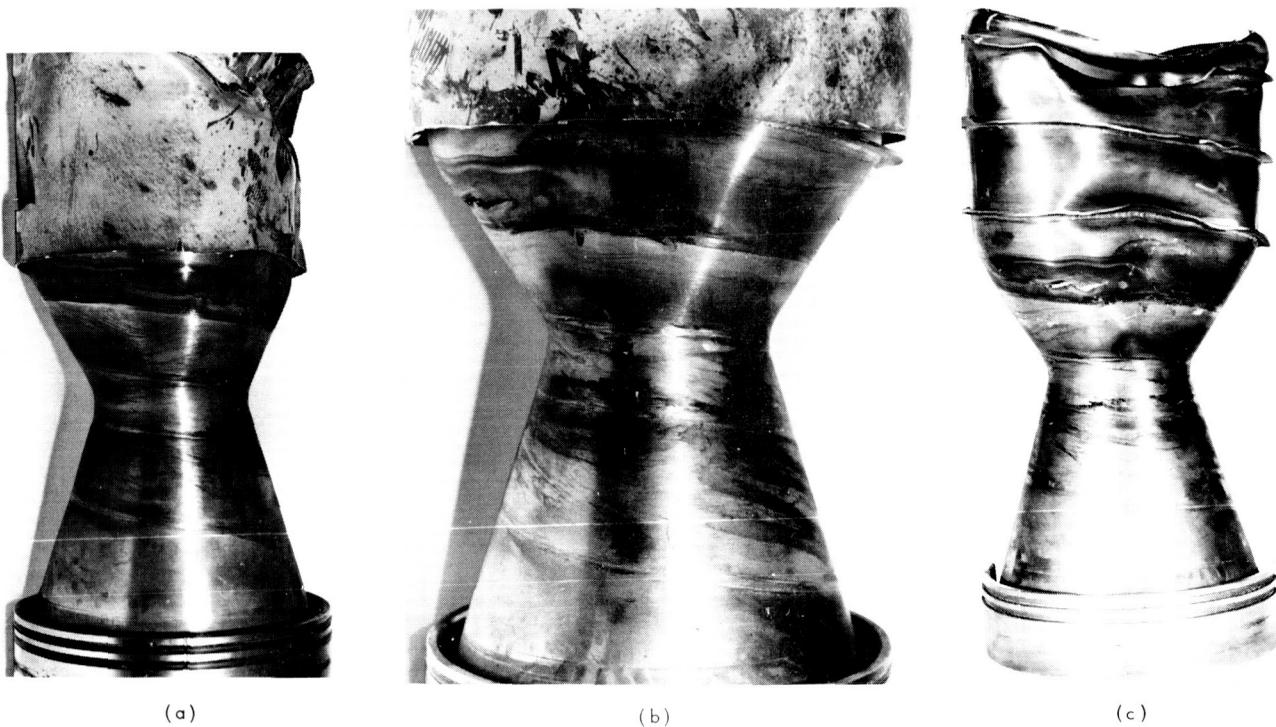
External photographs of NASA 4.126 GG burned-through thrust chamber: (a) jacket partially cut off; (b) chamber turned 90°; (c) jacket, injector, sleeve assembly cut off.
